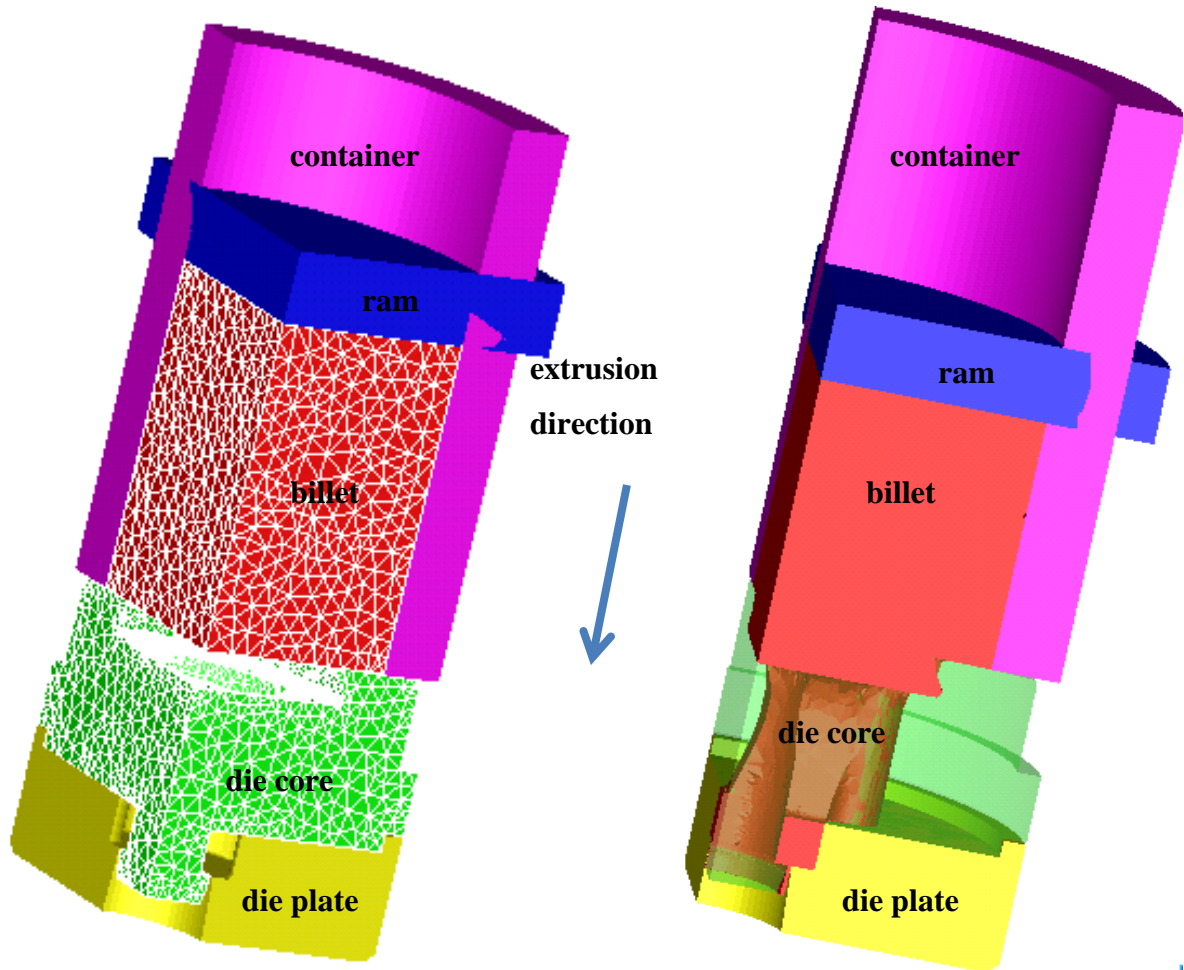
shows the extrusion set up for the simulated die for tube extrusion. Figure 4.9 describes the various parts of the extrusion set up such as container, billet, ram, die core and die plate. Die plate deflection is assumed to be minimal in relation to the core deflection.
